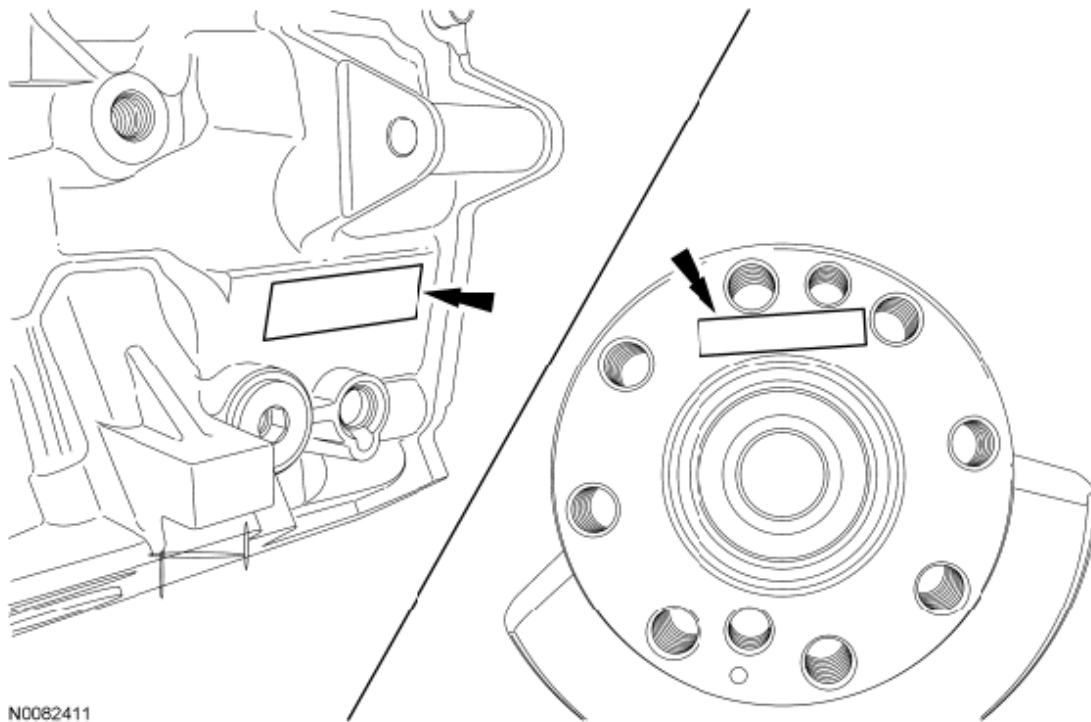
Locating Cylinder Block Face And Crankshaft Flange Codes
